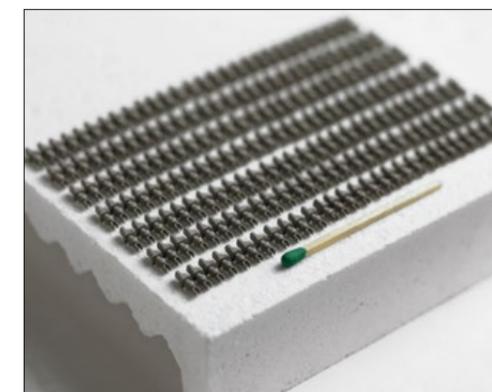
Delicate CIM parts such as these insulators for a Märklin model railway require gentle handling (Photo courtesy Arburg)
